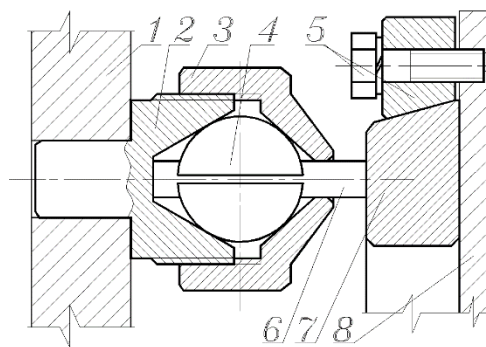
Sample fastening scheme: 1 – caliper, 2 – saddle, 3 – nut, 4 – spherical joint, 5 – counterbody retainer, 6 – sample, 7 – counterbody, 8 – washer
